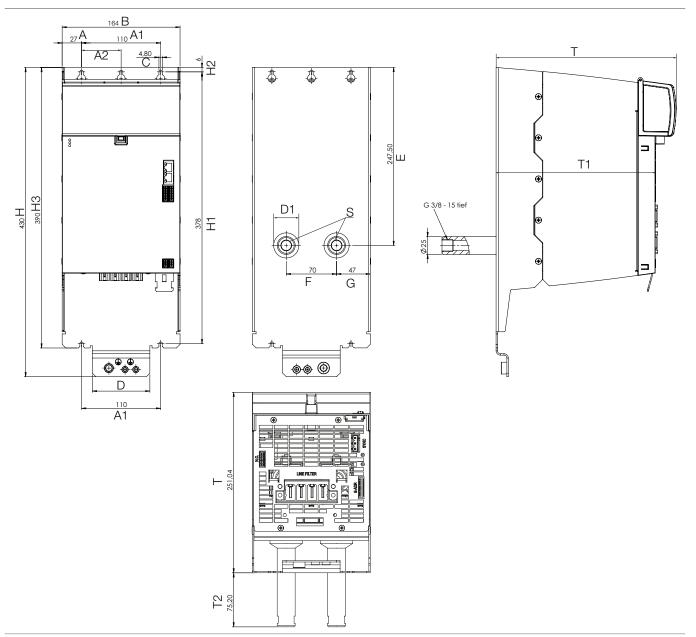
Dimensional sketches, KeDrive D3-DP 310 supply module, liquid cooling
